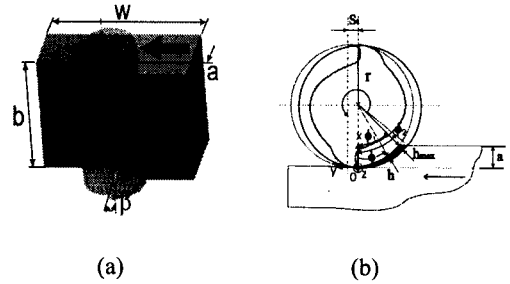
(a) Schematic and (b) cross section of up-end milling process.
